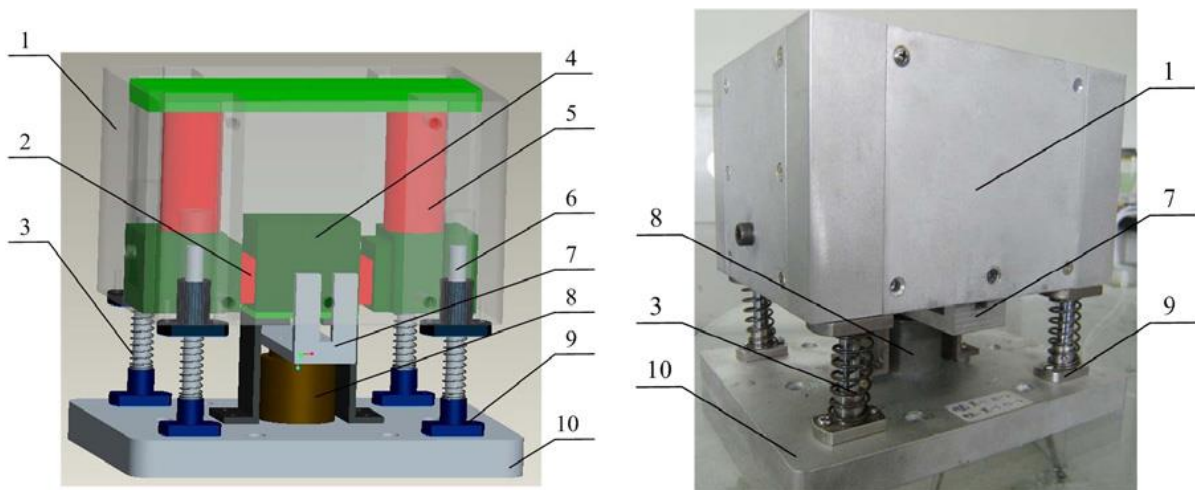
24 The MRE AATVA (a) schematic diagram and (b) photograph: (1) mounting shell; (2) MRE; (3) helical spring; (4) shear block; (5) magnetic conductor; (6) guide rod; (7) connector of the voice coil motor and the shell; (8) voice coil motor; (9) flange; (10) base.
